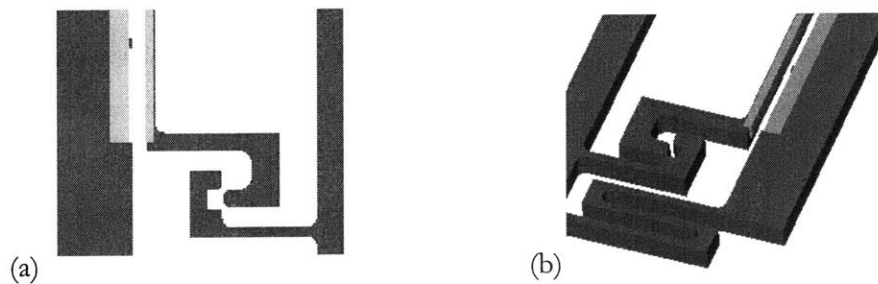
Close up view of the clutch (a: top view, b: 3D view).
